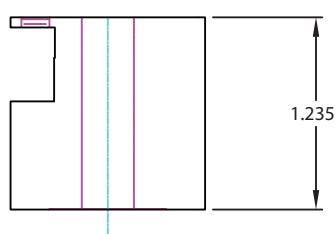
This diagram shows the finished height of the modified Single Position 1/4" Tool Post, P/N 40180.
